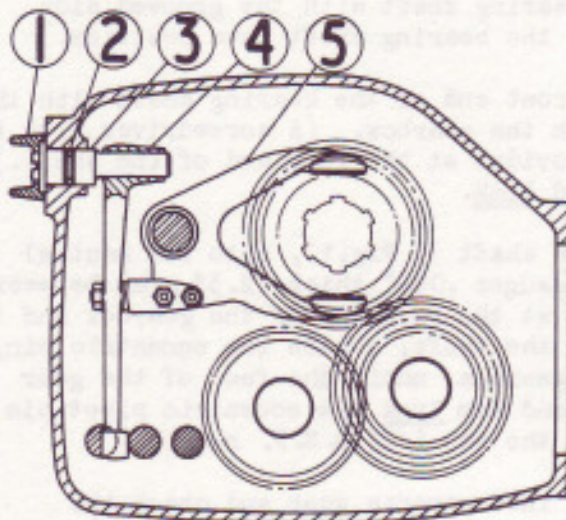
SECTION - 3rd & 4th SPEED OPERATING LEVER ASSEMBLY.
